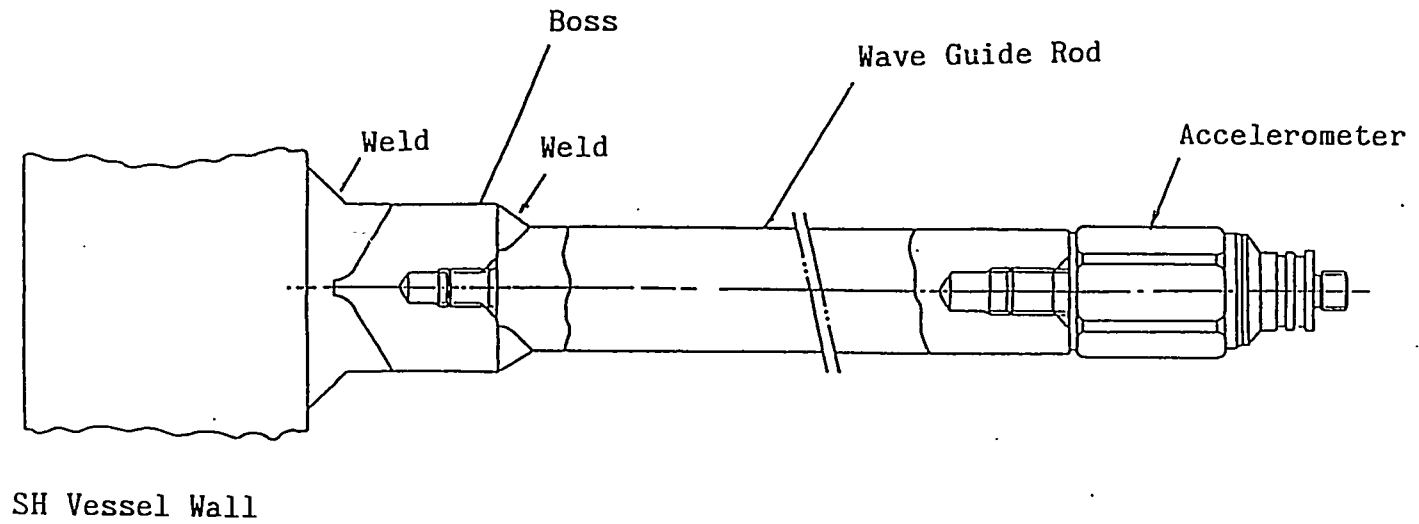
Wave Guide Rod Mounting on Monju Superheater
